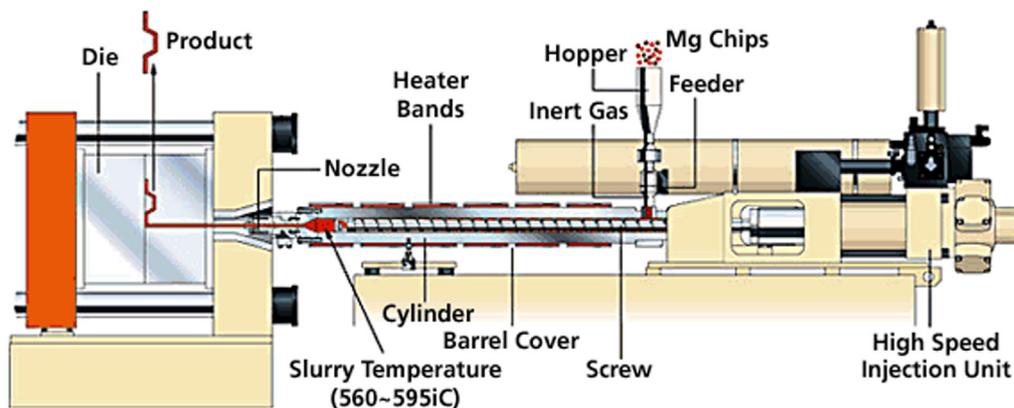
A schematic diagram of a Thixomolding machine [21].
